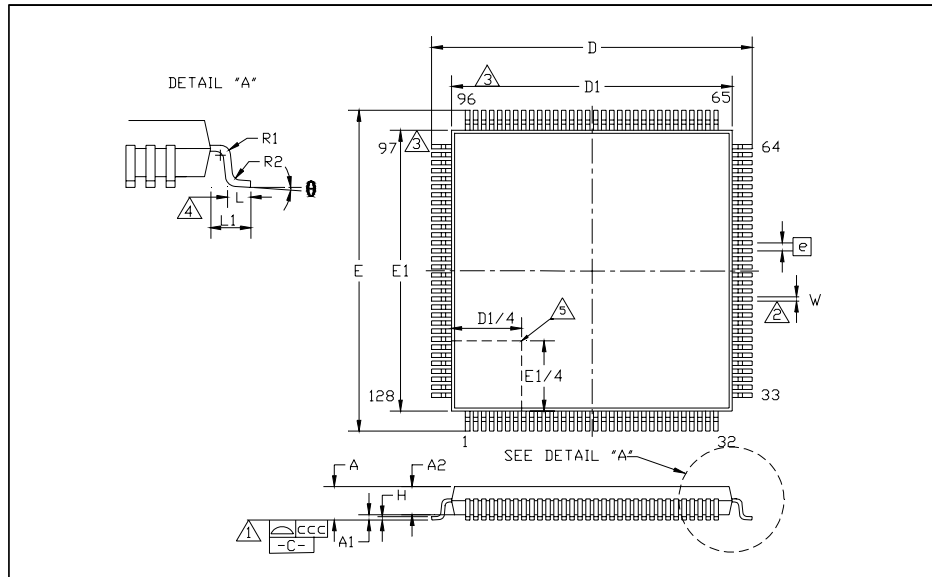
128 Pin VTQN Package Outline, 14x14x1.0 Body, 2 MM Footprint
